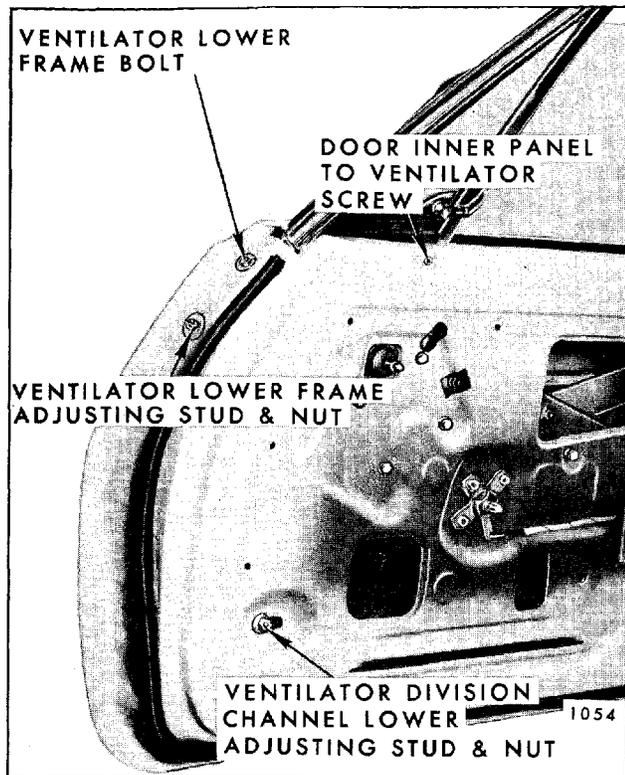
Front Door Ventilator Attachments - "Z" Styles
